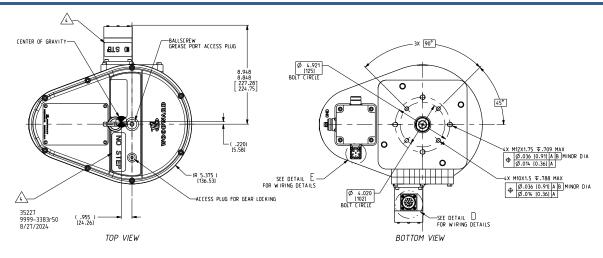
ELA7 & ELA13 Outline Drawing (Top and Bottom View)
